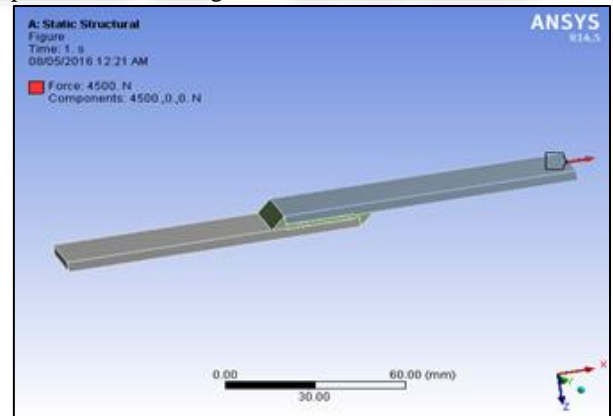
CAD Model of 1mm Thick Adhesive Lap Joint with  $60^{\circ}$  Surface Pattern Angle & 0.75mm Depth
